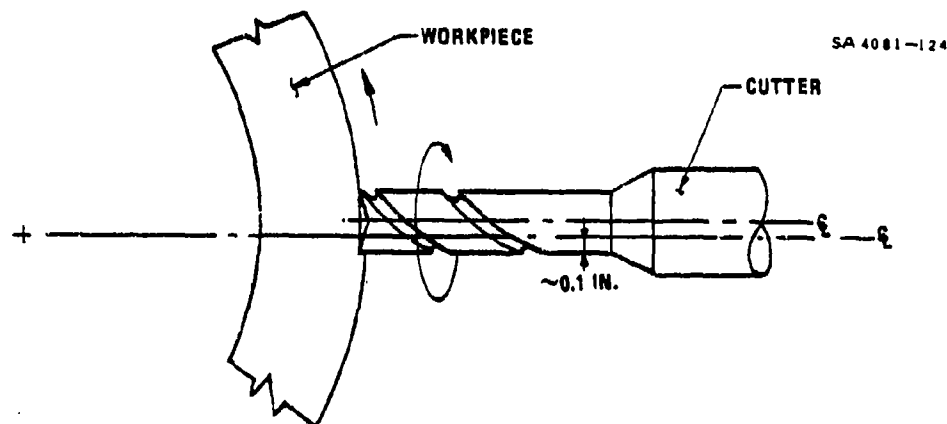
Recommended Cutter-Workpiece Orientation for End Mill Turning
